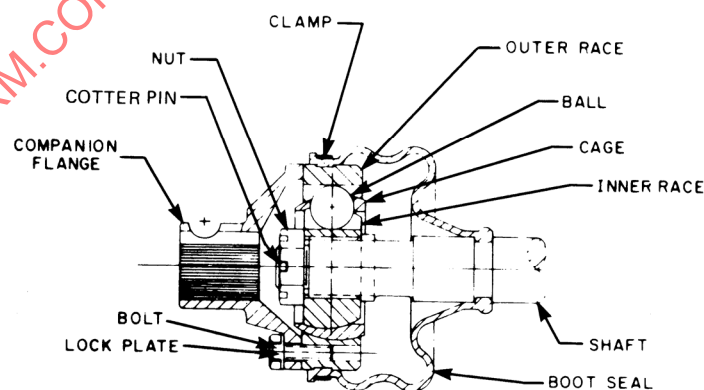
DOUBLE OFFSET OR DO UNIVERSAL JOINT (FIXED CENTER TYPE)—STEERING SHAFT DESIGN ILLUSTRATED
